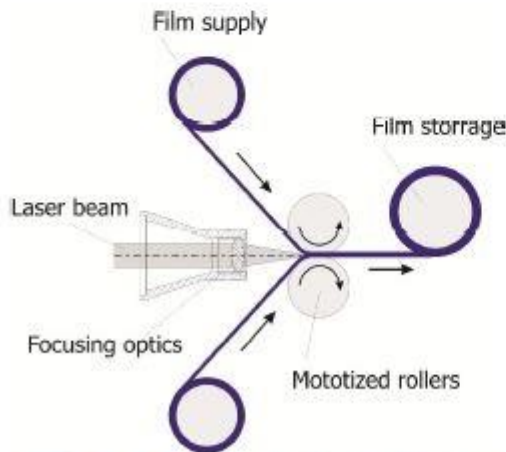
Schematic of slit laser beam welding of multilayer film
